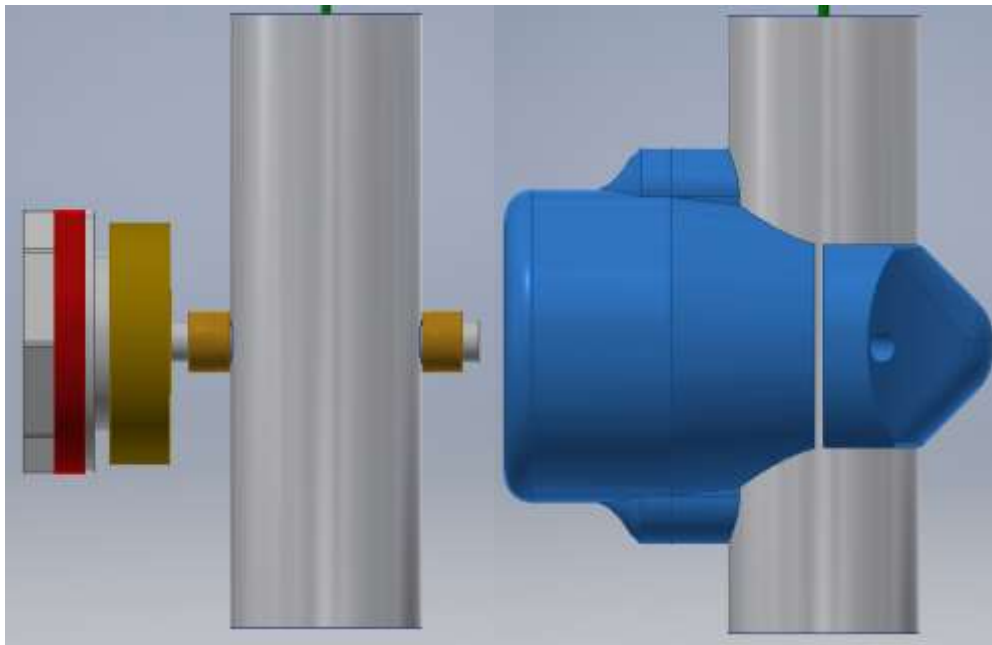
Top: exploded view of retractor. From left to right: arm, spacer (blue), tooth ring, thrust bearing (red), mounting rod, spiral spring, tether spool. Bottom: assembled view of retractor.
